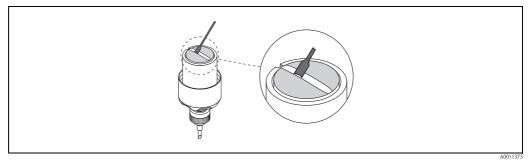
Coating the contact surfaces of the sensor with coupling fluid
